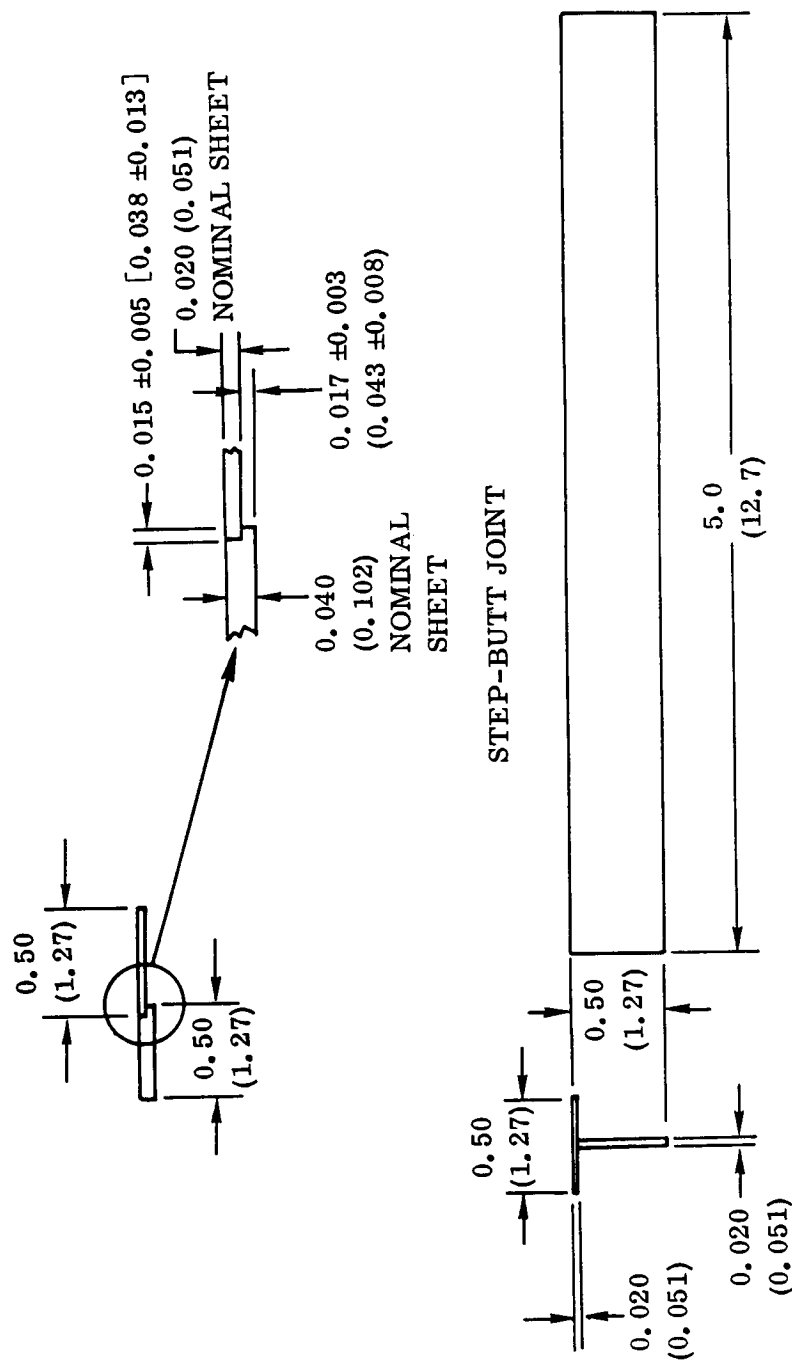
Electron Beam Weld Qualification and Tool Development
